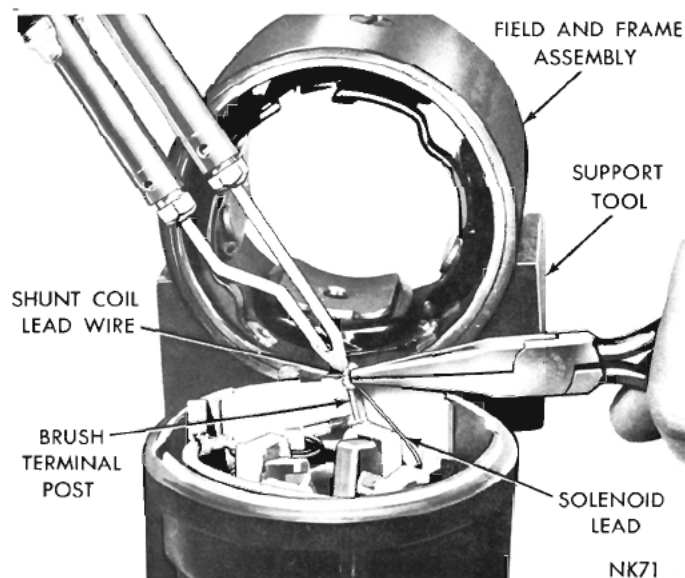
Unsoldering the Shunt Coil Lead Wire
